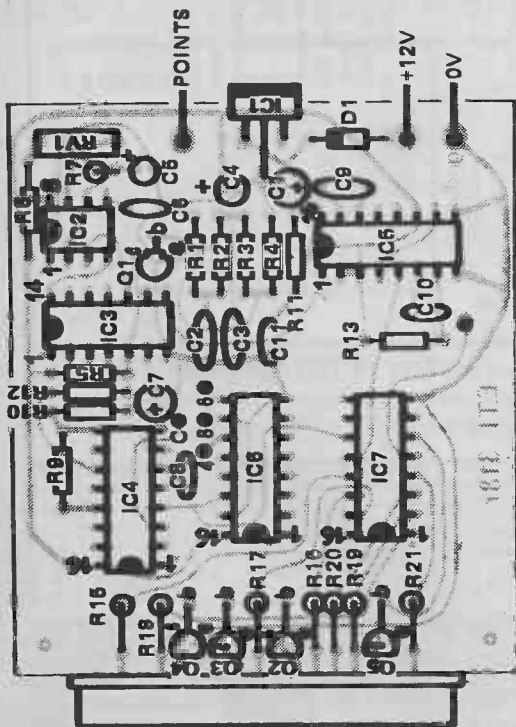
The component overlay for the board. The board is double sided although only the lower surface is shown here. Note the link between the two surfaces of the board near C10.
